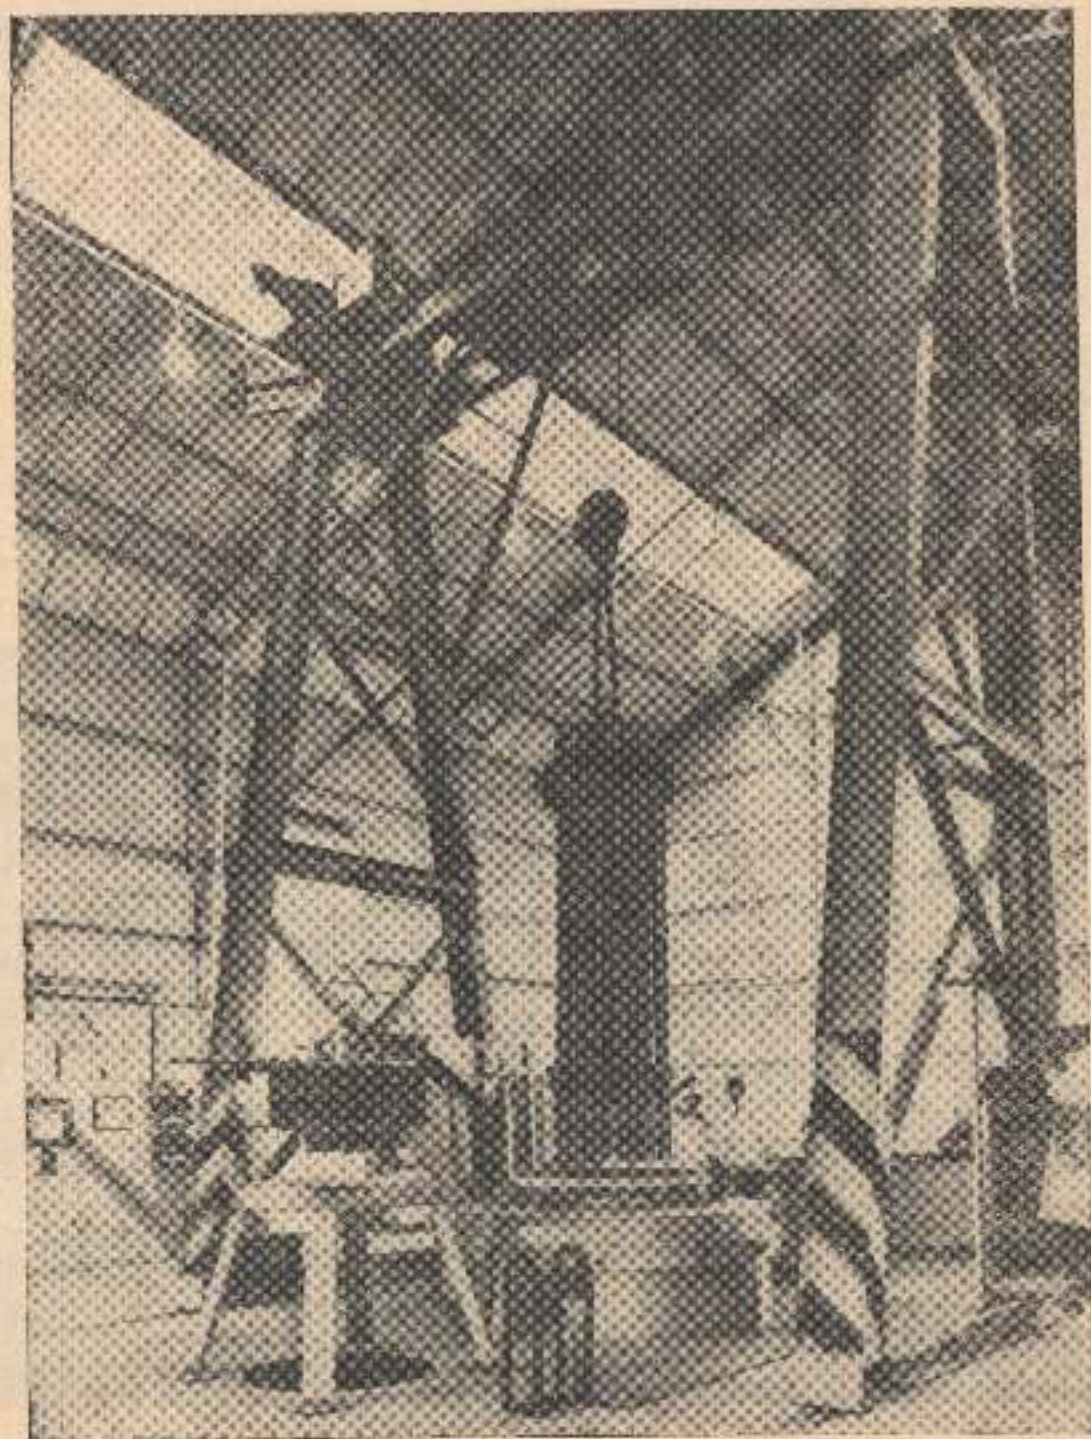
Gas-carburizing, pit-mounted, 3-zone furnace designed for gas carburizing rock-drill extension shafts in a suspended retort (Courtesy: Wild Barfield Ltd, England)
